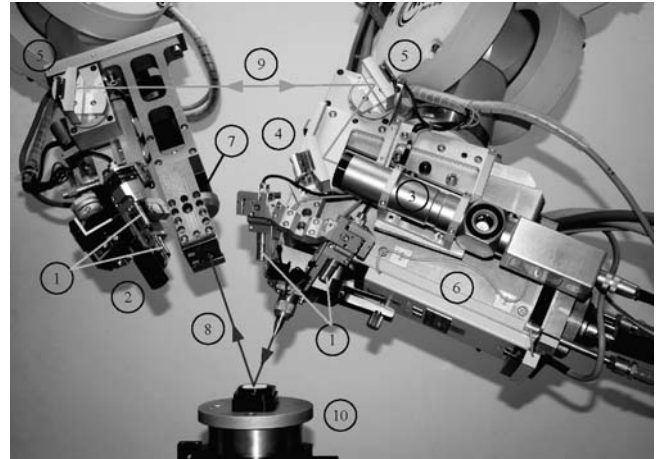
Detailed view of the optical measuring system to synchronize the two robots. 1 = laser line projectors, 2 = camera system, 3 = auto-collimation telescope, 4 = fixed deflector mirror, 5 = movable deflector mirror, 6 = X-ray source, 7 = X-ray detector, 8 = X-ray beam, 9 = laser beam, 10 = audit column.
